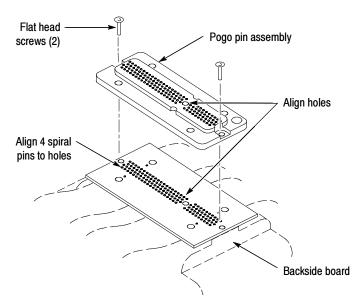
Replacing the Pogo pin assembly on the Backside board
